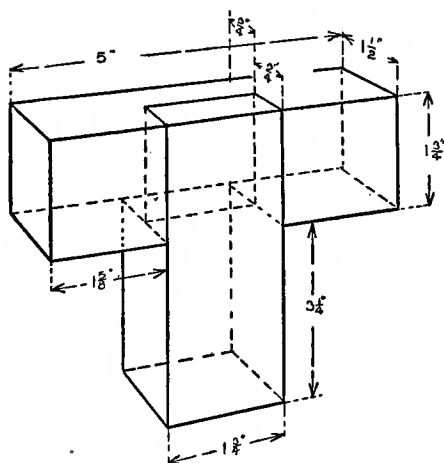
Perspective Drawing of Lap Joint with Dimensions
